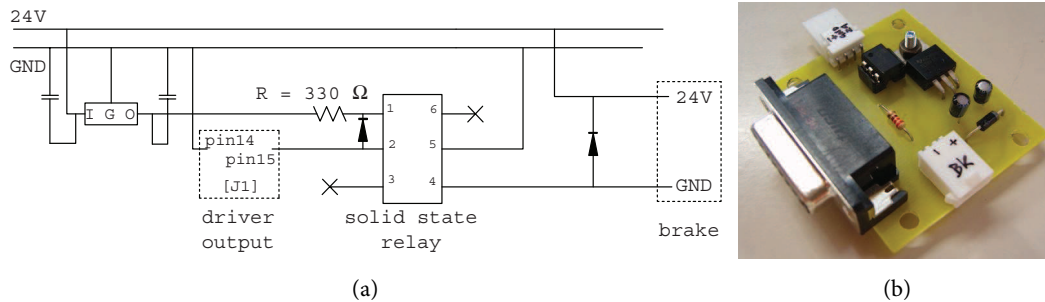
Brake circuit scheme (a) and its implementation on a PCB (b)
